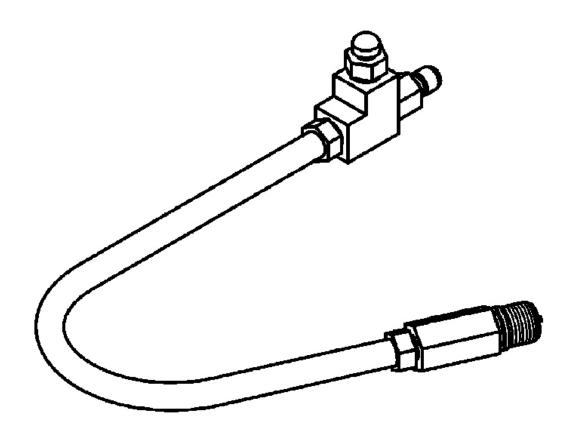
Adapter 8116 Courtesy of CHRYSLER LLC
